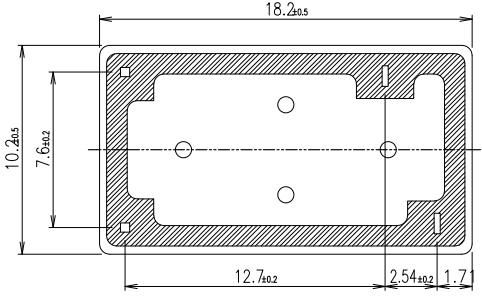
FIGURE FOR PRINTED CIRCUIT BOARD PROCESSING
